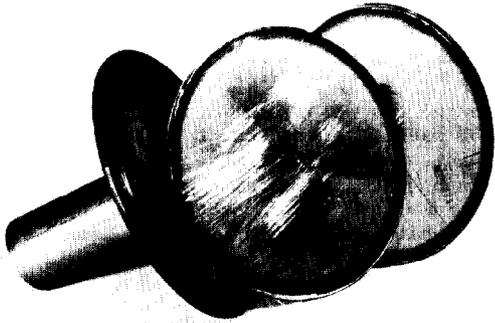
View of edge weld and burr on cut open flanges.
